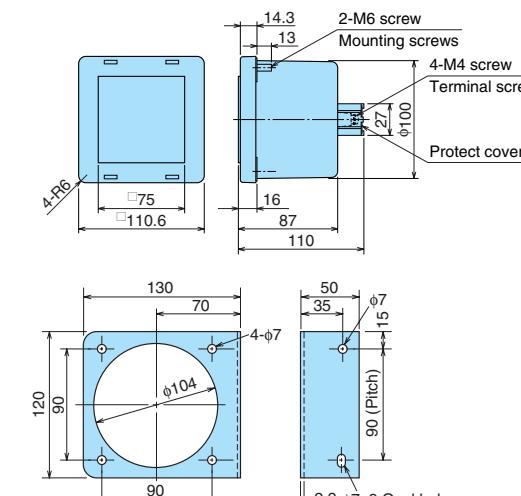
Dimensions of CTD and device-mounting fixture
